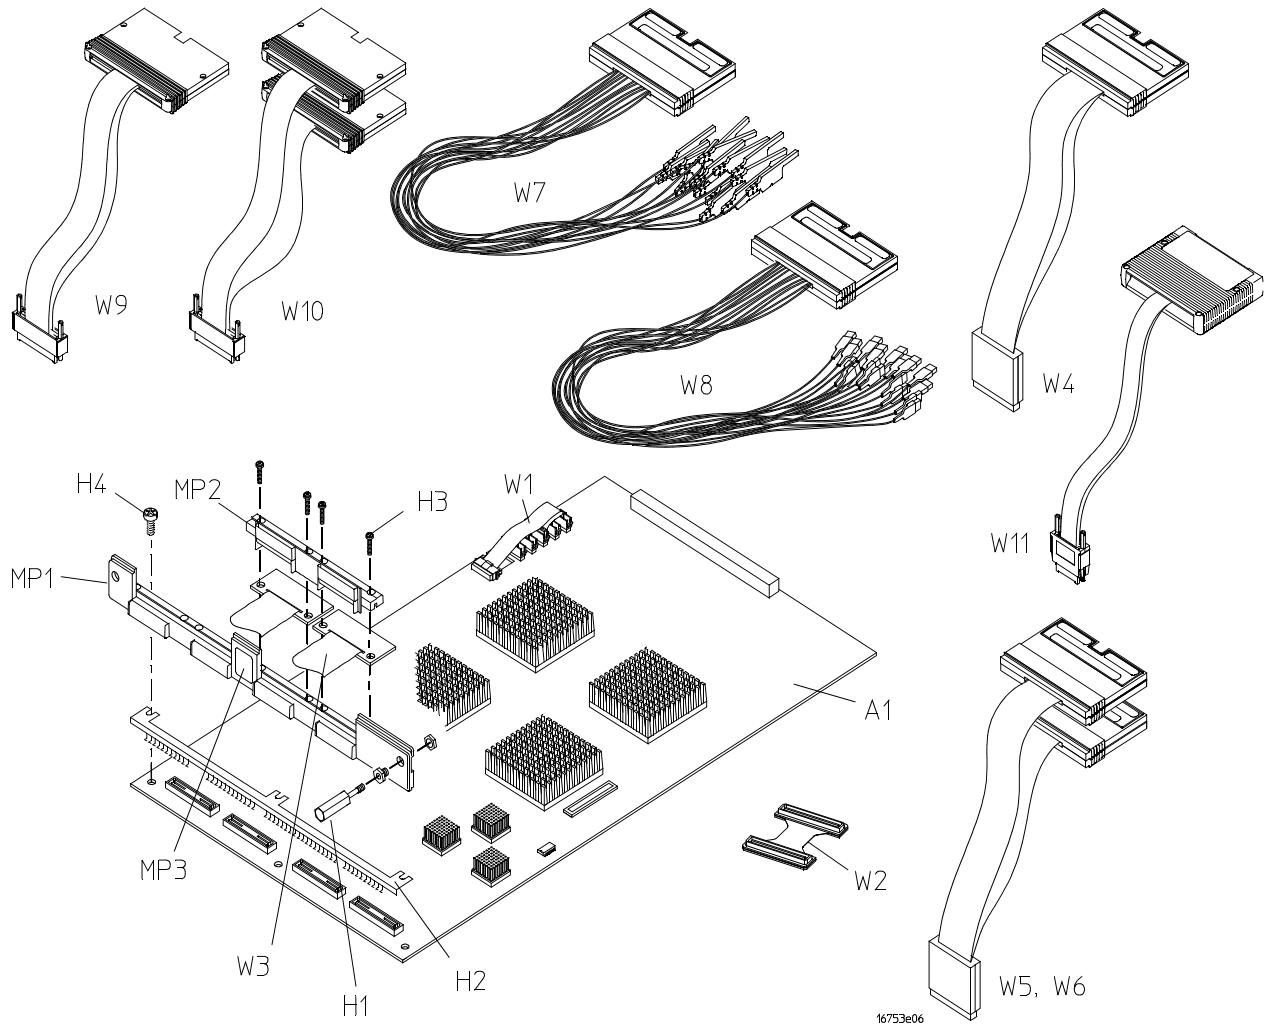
Exploded view of the 16753/54/55/56A or 16950A/B logic analyzer
